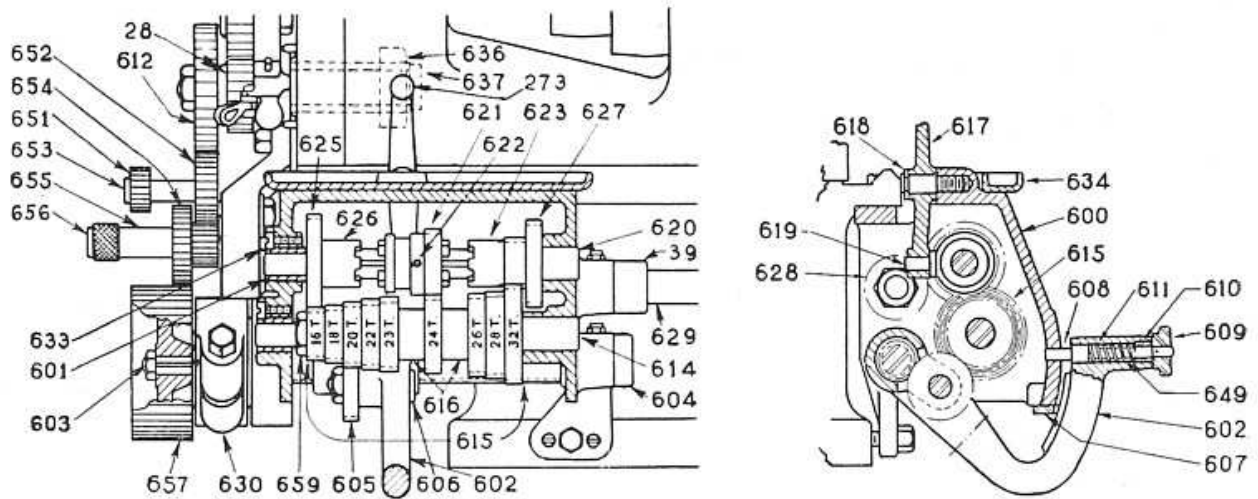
Line Drawing of Gear Box Unit Showing Position of Parts in Assembly.
